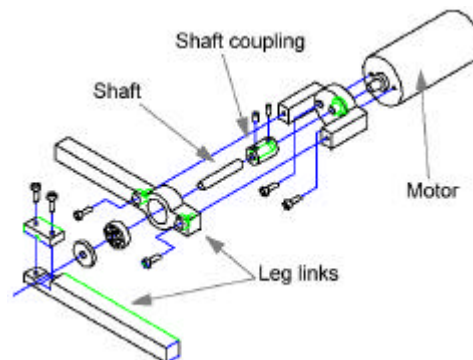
Creating small motor/linkage assemblies becomes difficult when conventional parts and manufacturing methods are employed
